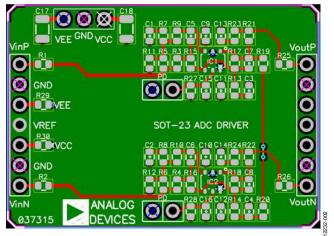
6-Lead SOT-23 ADC Driver, Component Side
